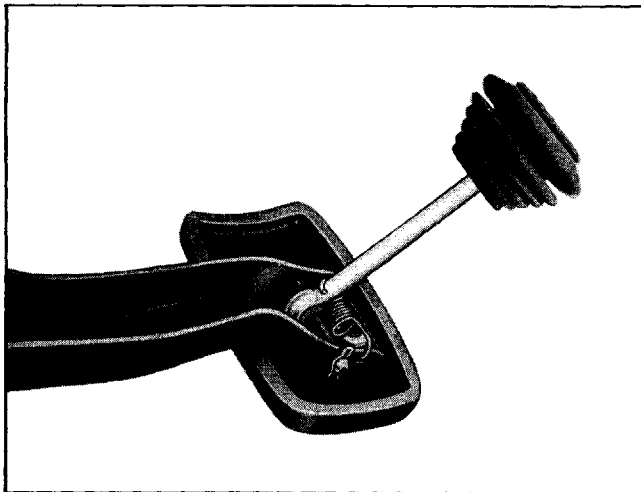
Correct Assembly of Brake Pedal to Push Rod
